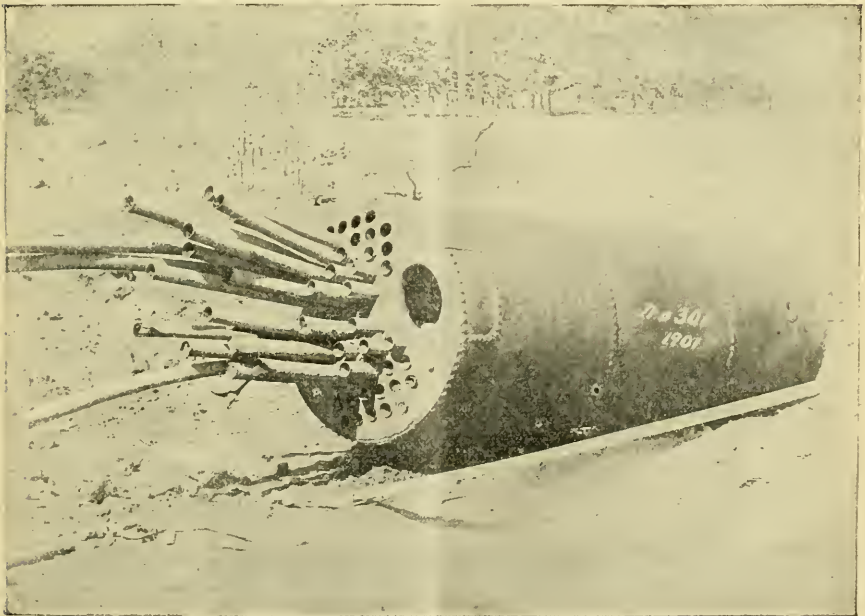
A BOILER THAT EXPLODED FROM ACCUMULATED SCALE.
